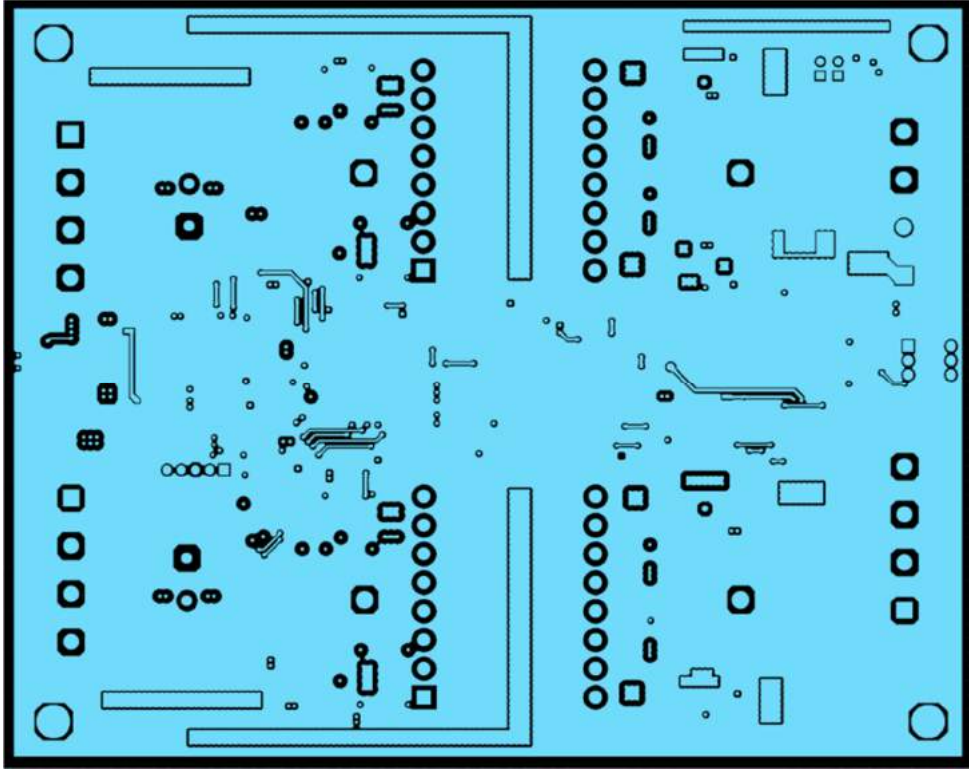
Middle-1 copper layer of the 4-layer PCB
